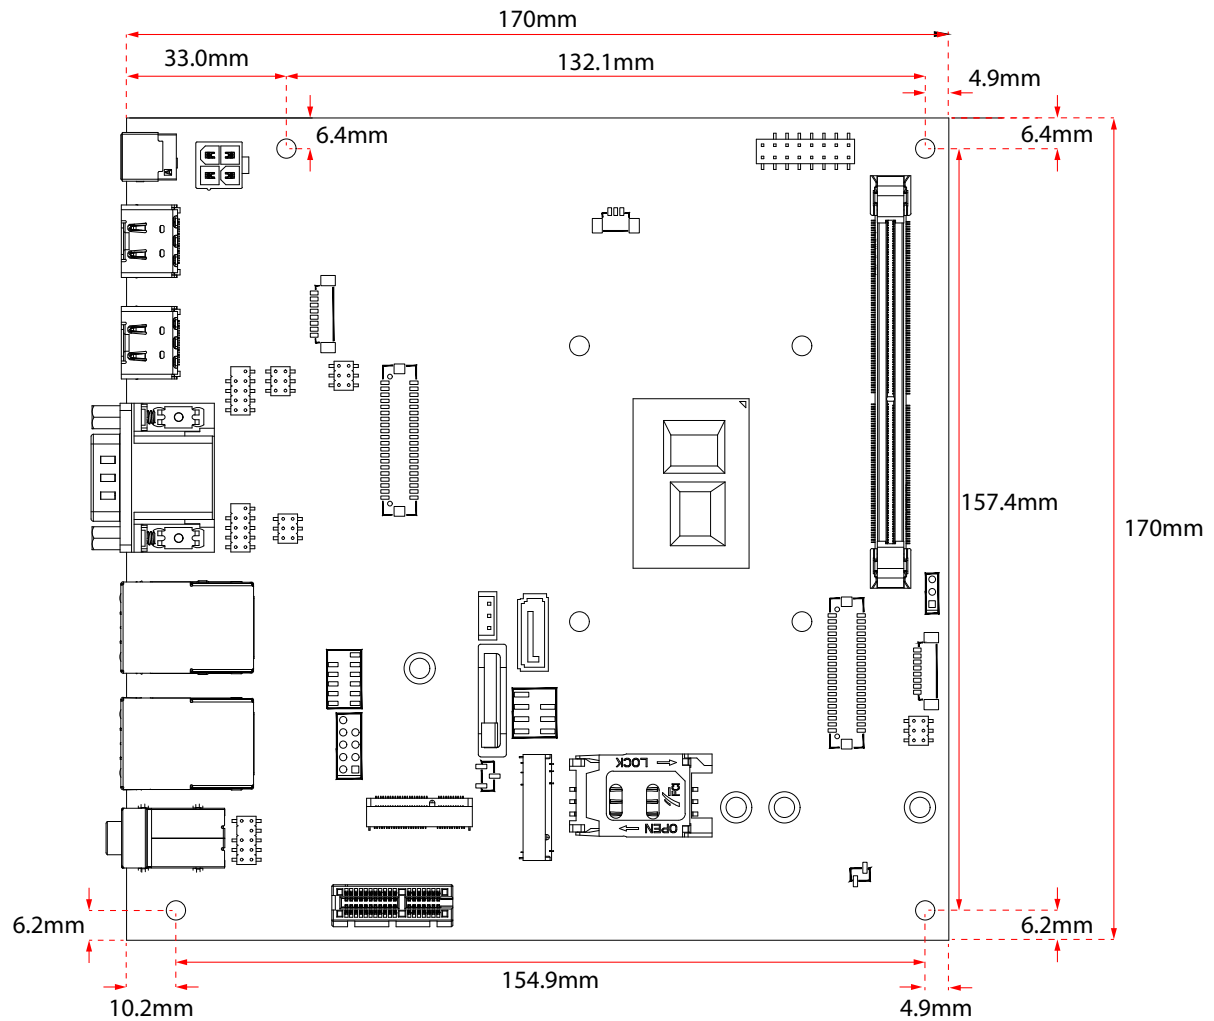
Mounting holes and dimensions of the VIA EPIA-M930
